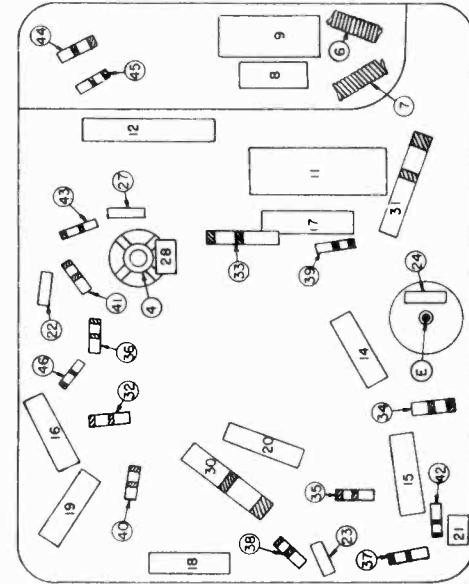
PARTS LAYOUT--DASH UNIT--Bottom View
